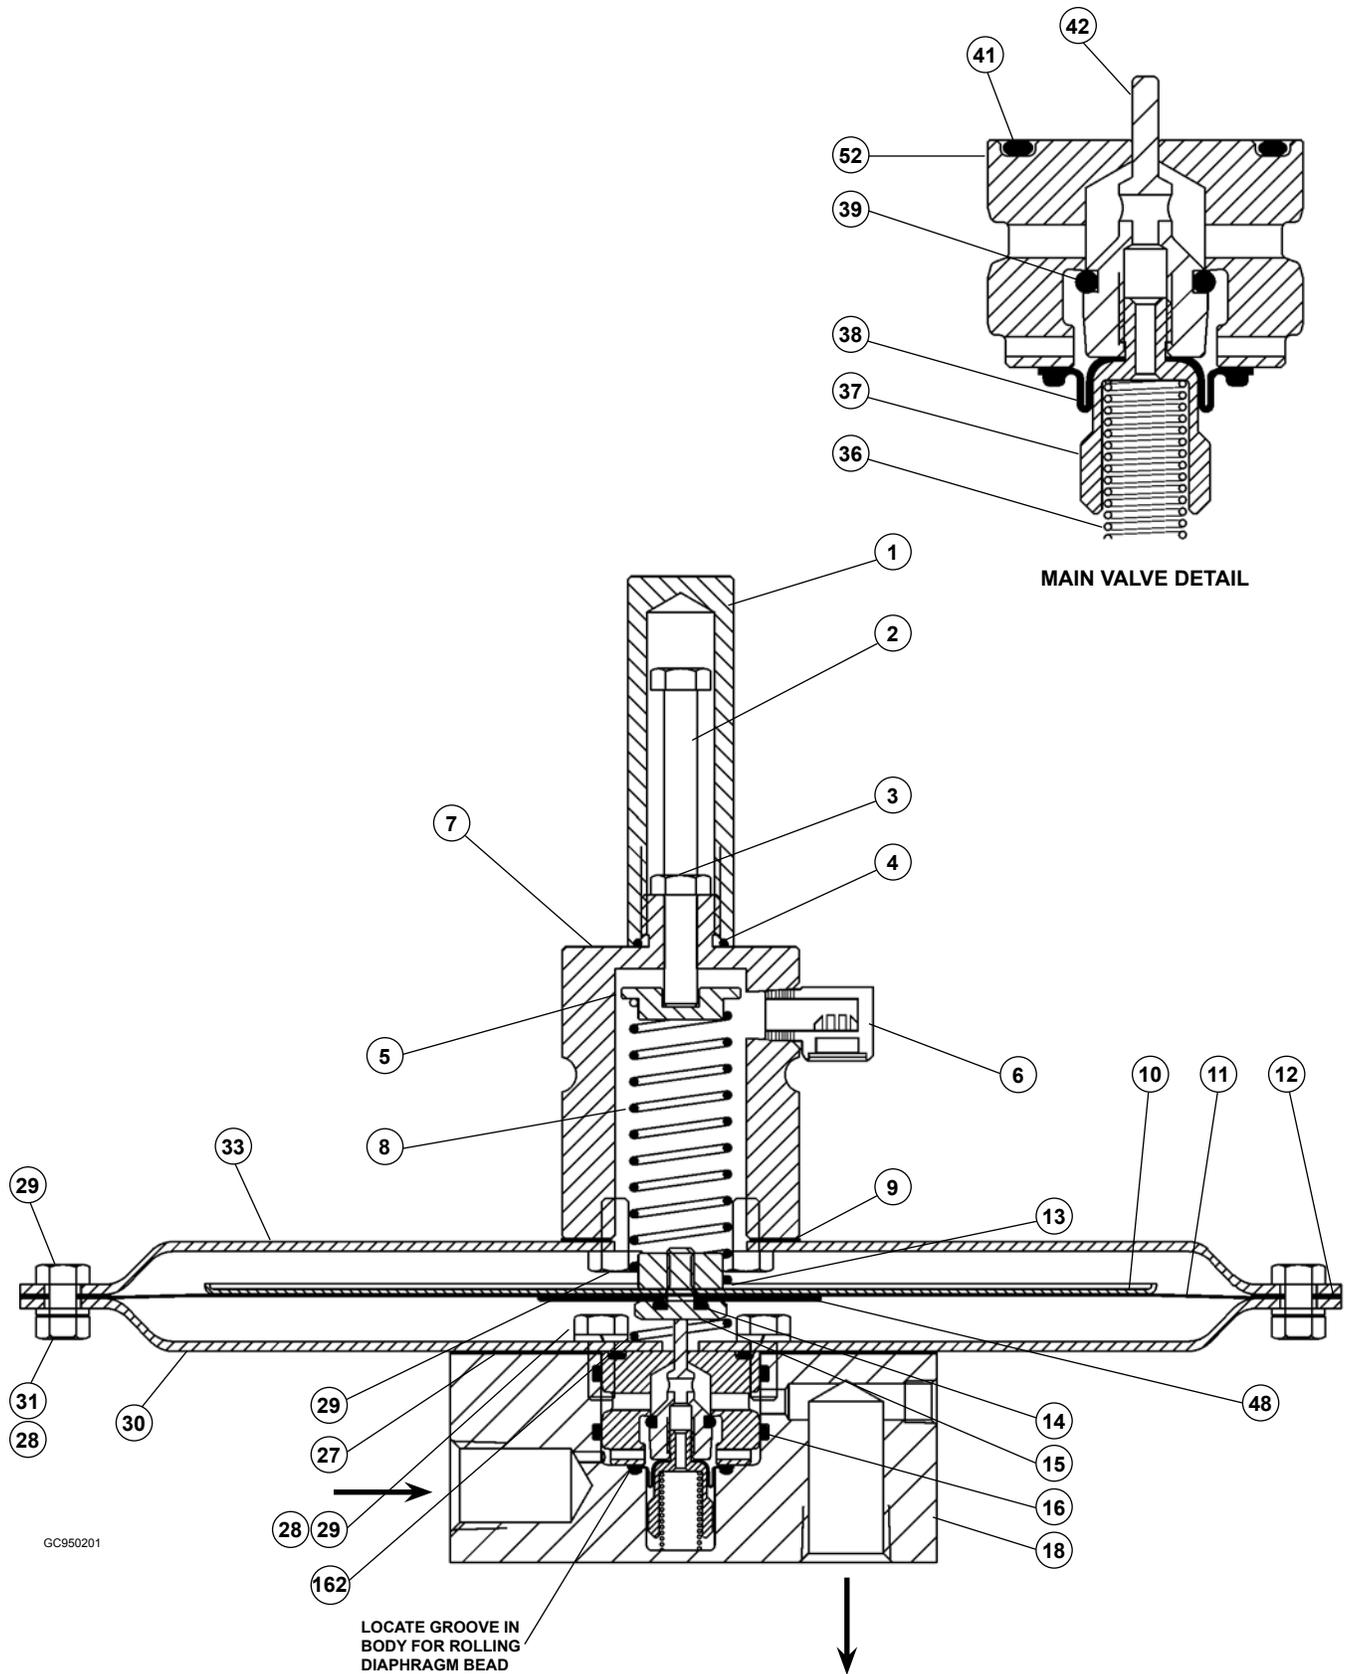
Type ACE95jr Tank Blanketing Valve Assembly
